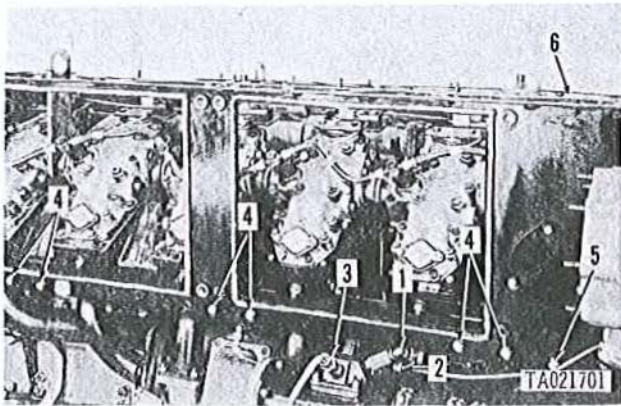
Removing or installing fuel filter constant bleed hose.
